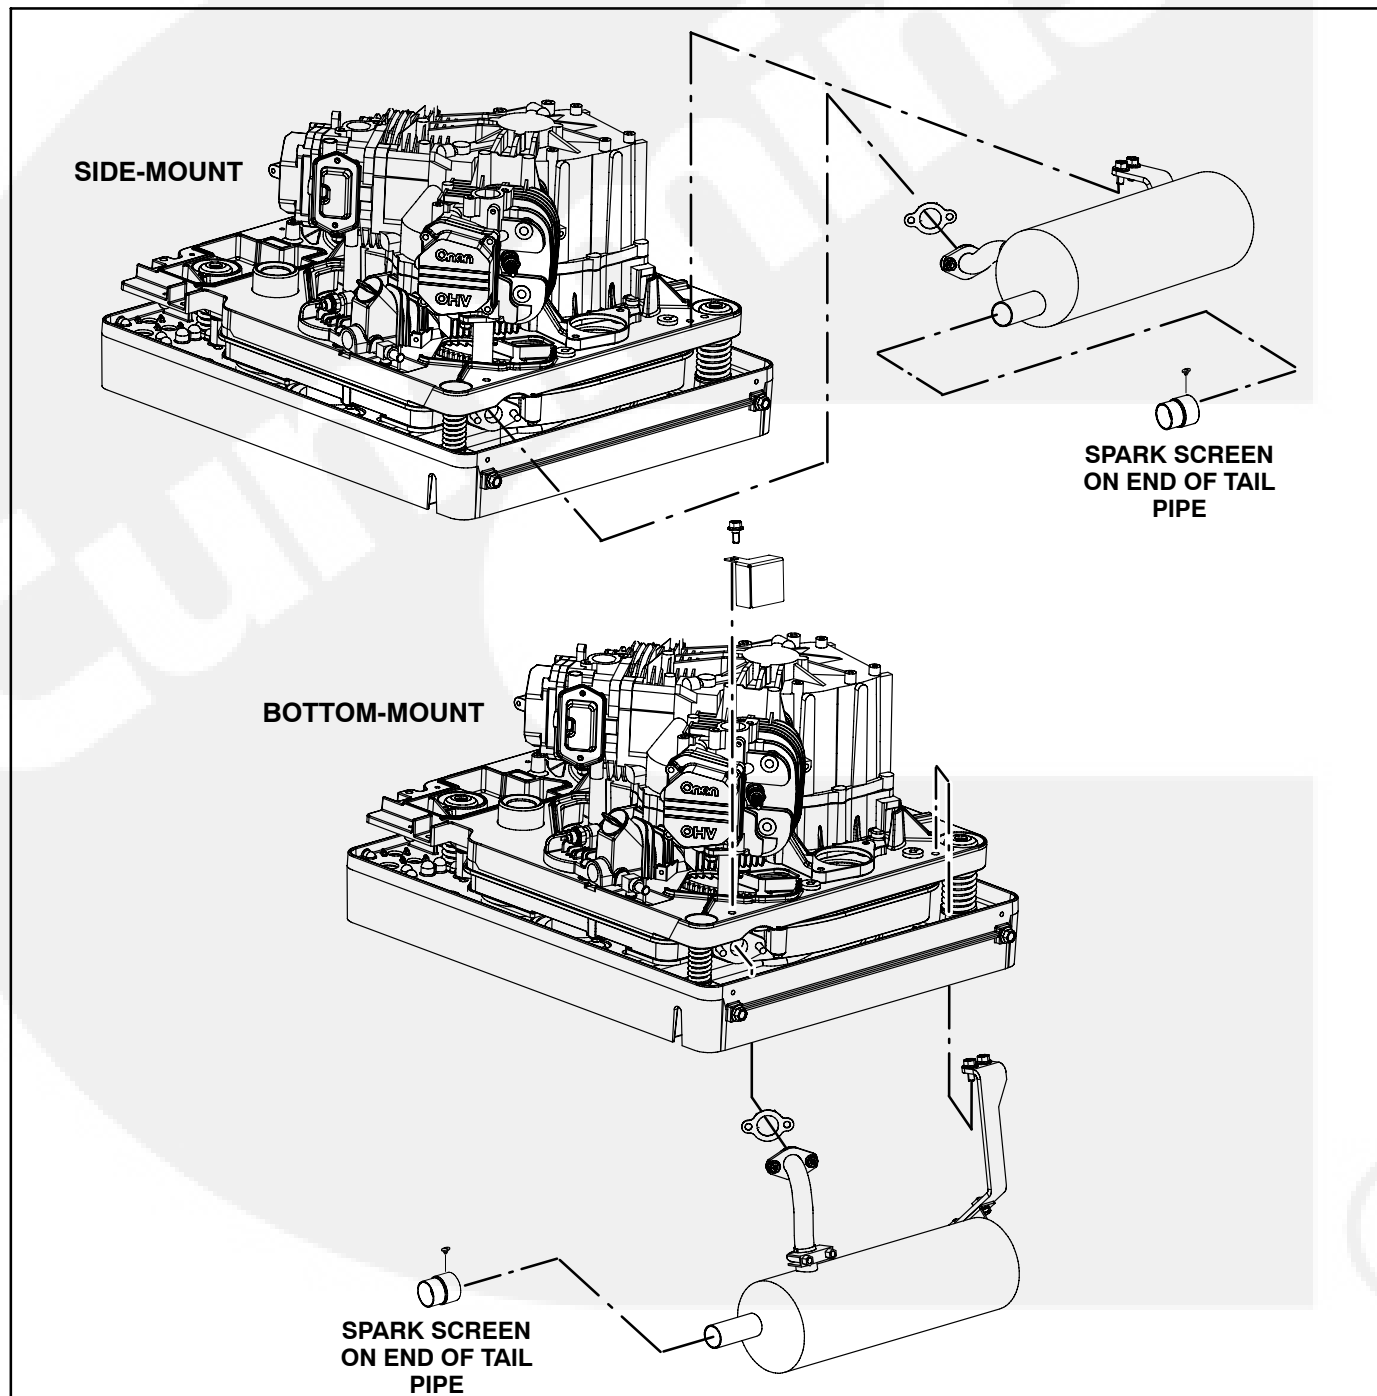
MODEL HGJAC, HGJAF MUFFLER
